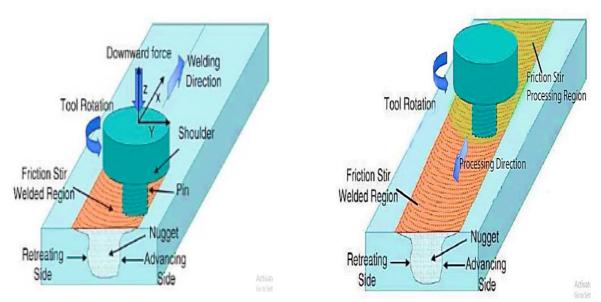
,2) Friction stir welding and friction stir processing [12]
